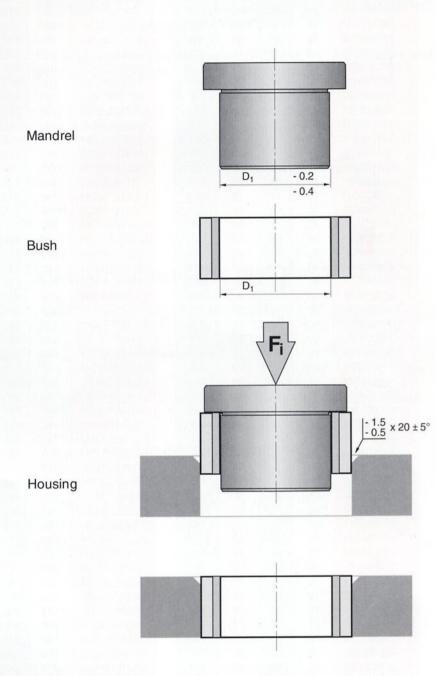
Press-fitting a GAR-MAX® bush using a mandrel
